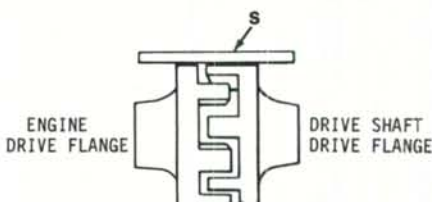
Engine drive flange should be 0-0.3 mm (0-0.012 in.) higher than drive shaft drive flange. Lay straightedge (S) across components and use a feeler gage to measure.
